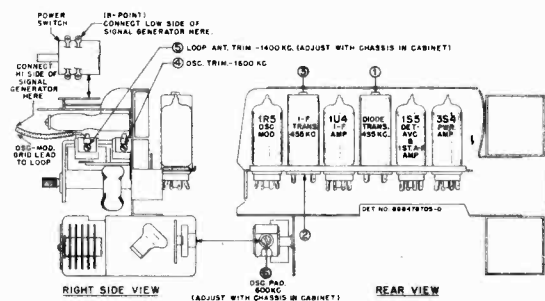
CHASSIS HS-62 TUBE & TRIMMER LOCATIONS
